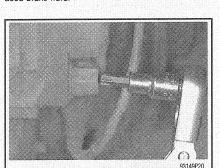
This Continental uses a Torx ° driver to remove the caliper pins. Make sure the proper size is used and the driver is seated in the pin tightly
